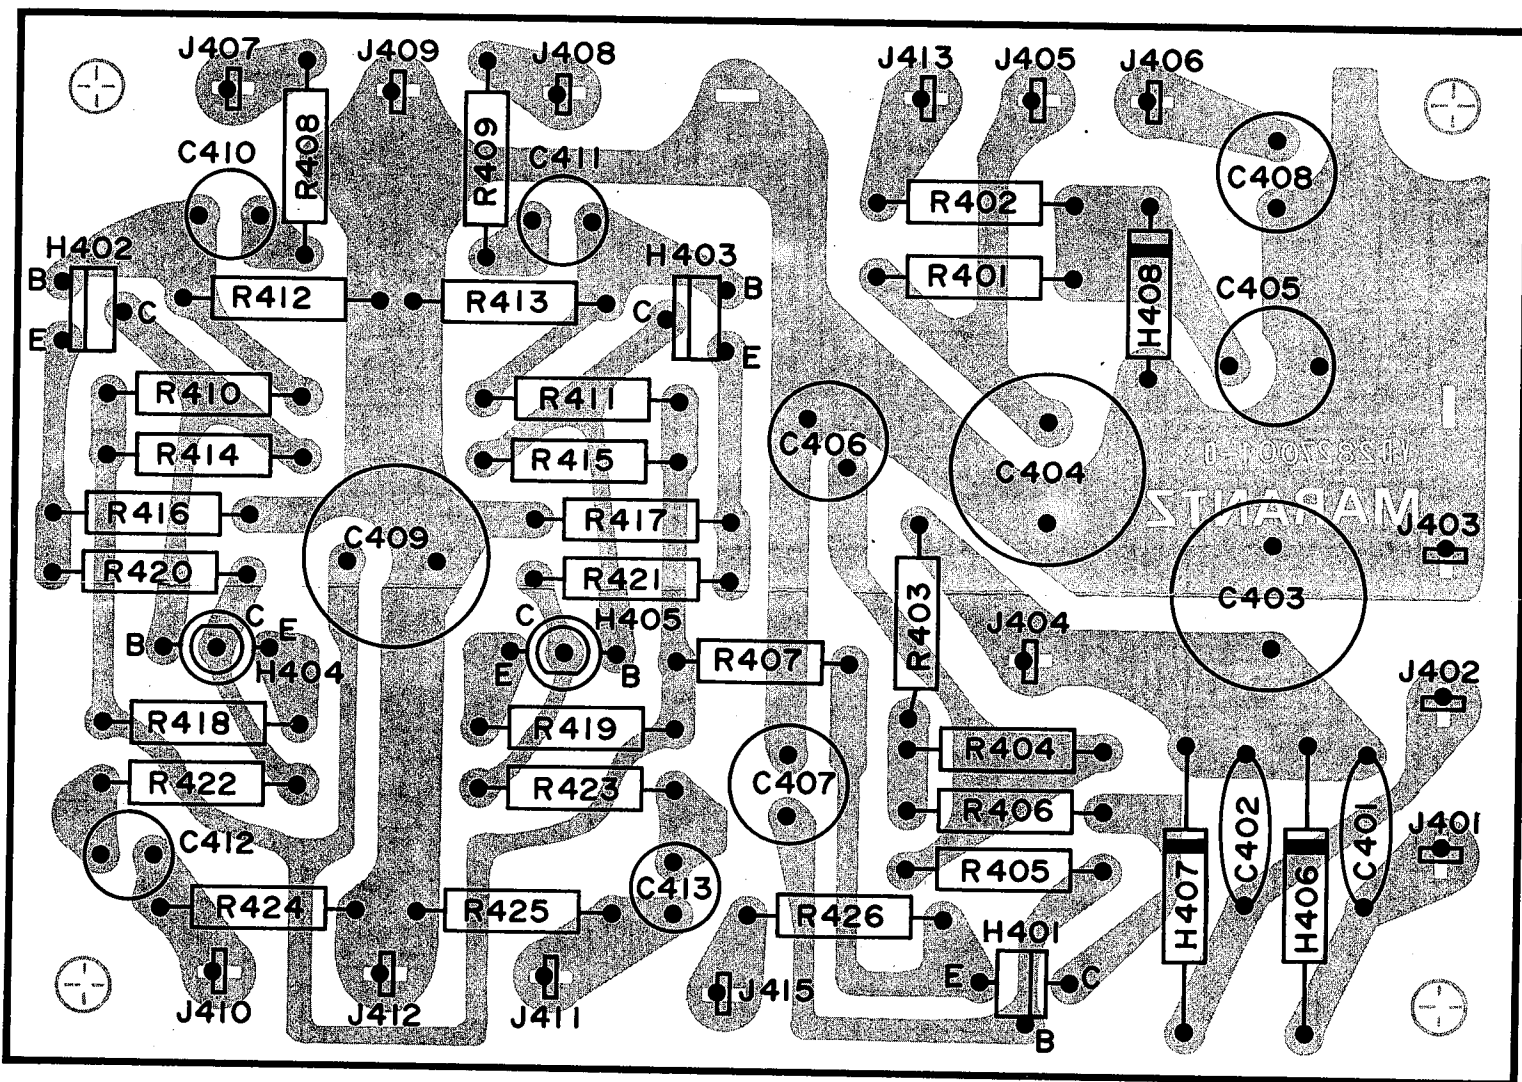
Pre-Amplifier and Power Supply Assembly P400 Component Locations
